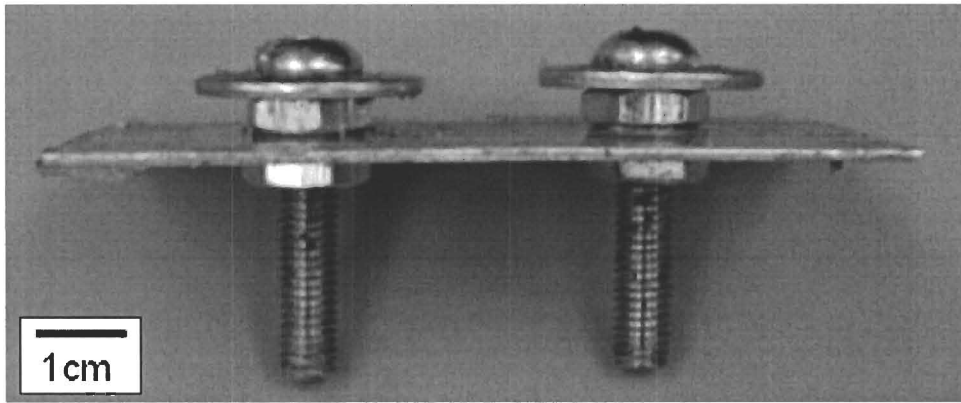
Screw Assemblies Mounted on Sheet Metal
